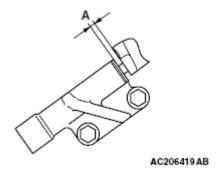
Removing Set Pin Courtesy of MITSUBISHI MOTOR SALES OF AMERICA.
